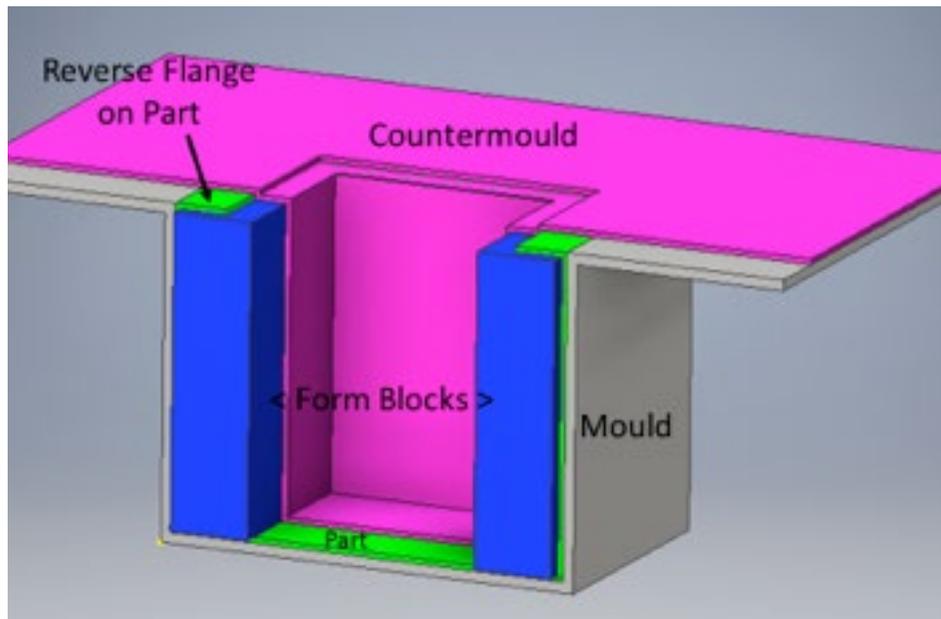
Shows a cutaway of an LRTM mould with a Part with a Return Flange. It also shows the arrangement of Form Blocks and Countermould without the seal detail.
